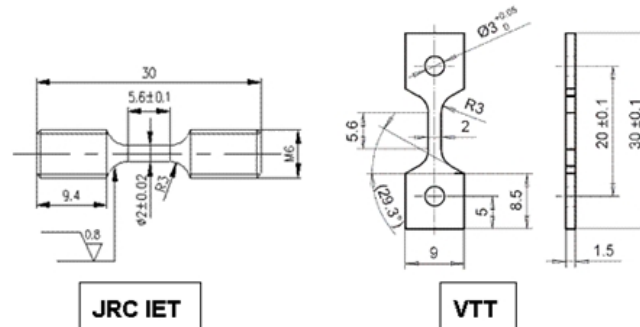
Schematic drawing of the tensile specimens tested in JRC IET and VTT SCW autoclaves.
